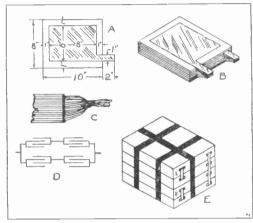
A—DIMENSIONS OF FOIL AND GLASS PLATE; B—ASSEMBLED PARTS: C—DETAIL OF LUG: D -SERIES-PARALLEL CONNECTIONS; E — FOUR UNITS IN SERIES-PARALLEL
